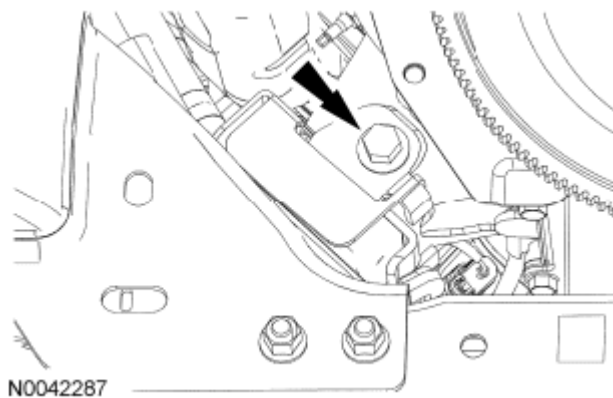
Locating LH Engine Support Insulator Through Bolt
